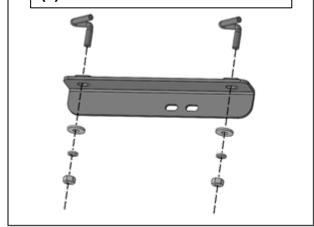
Attach the Driver/Left Center Mounting Bracket to the Support Bracket
